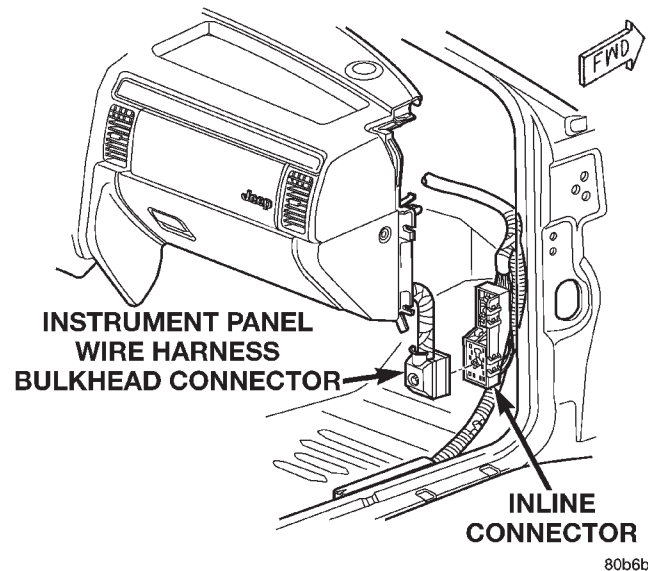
Instrument Panel Passenger Side Bulkhead Connection
